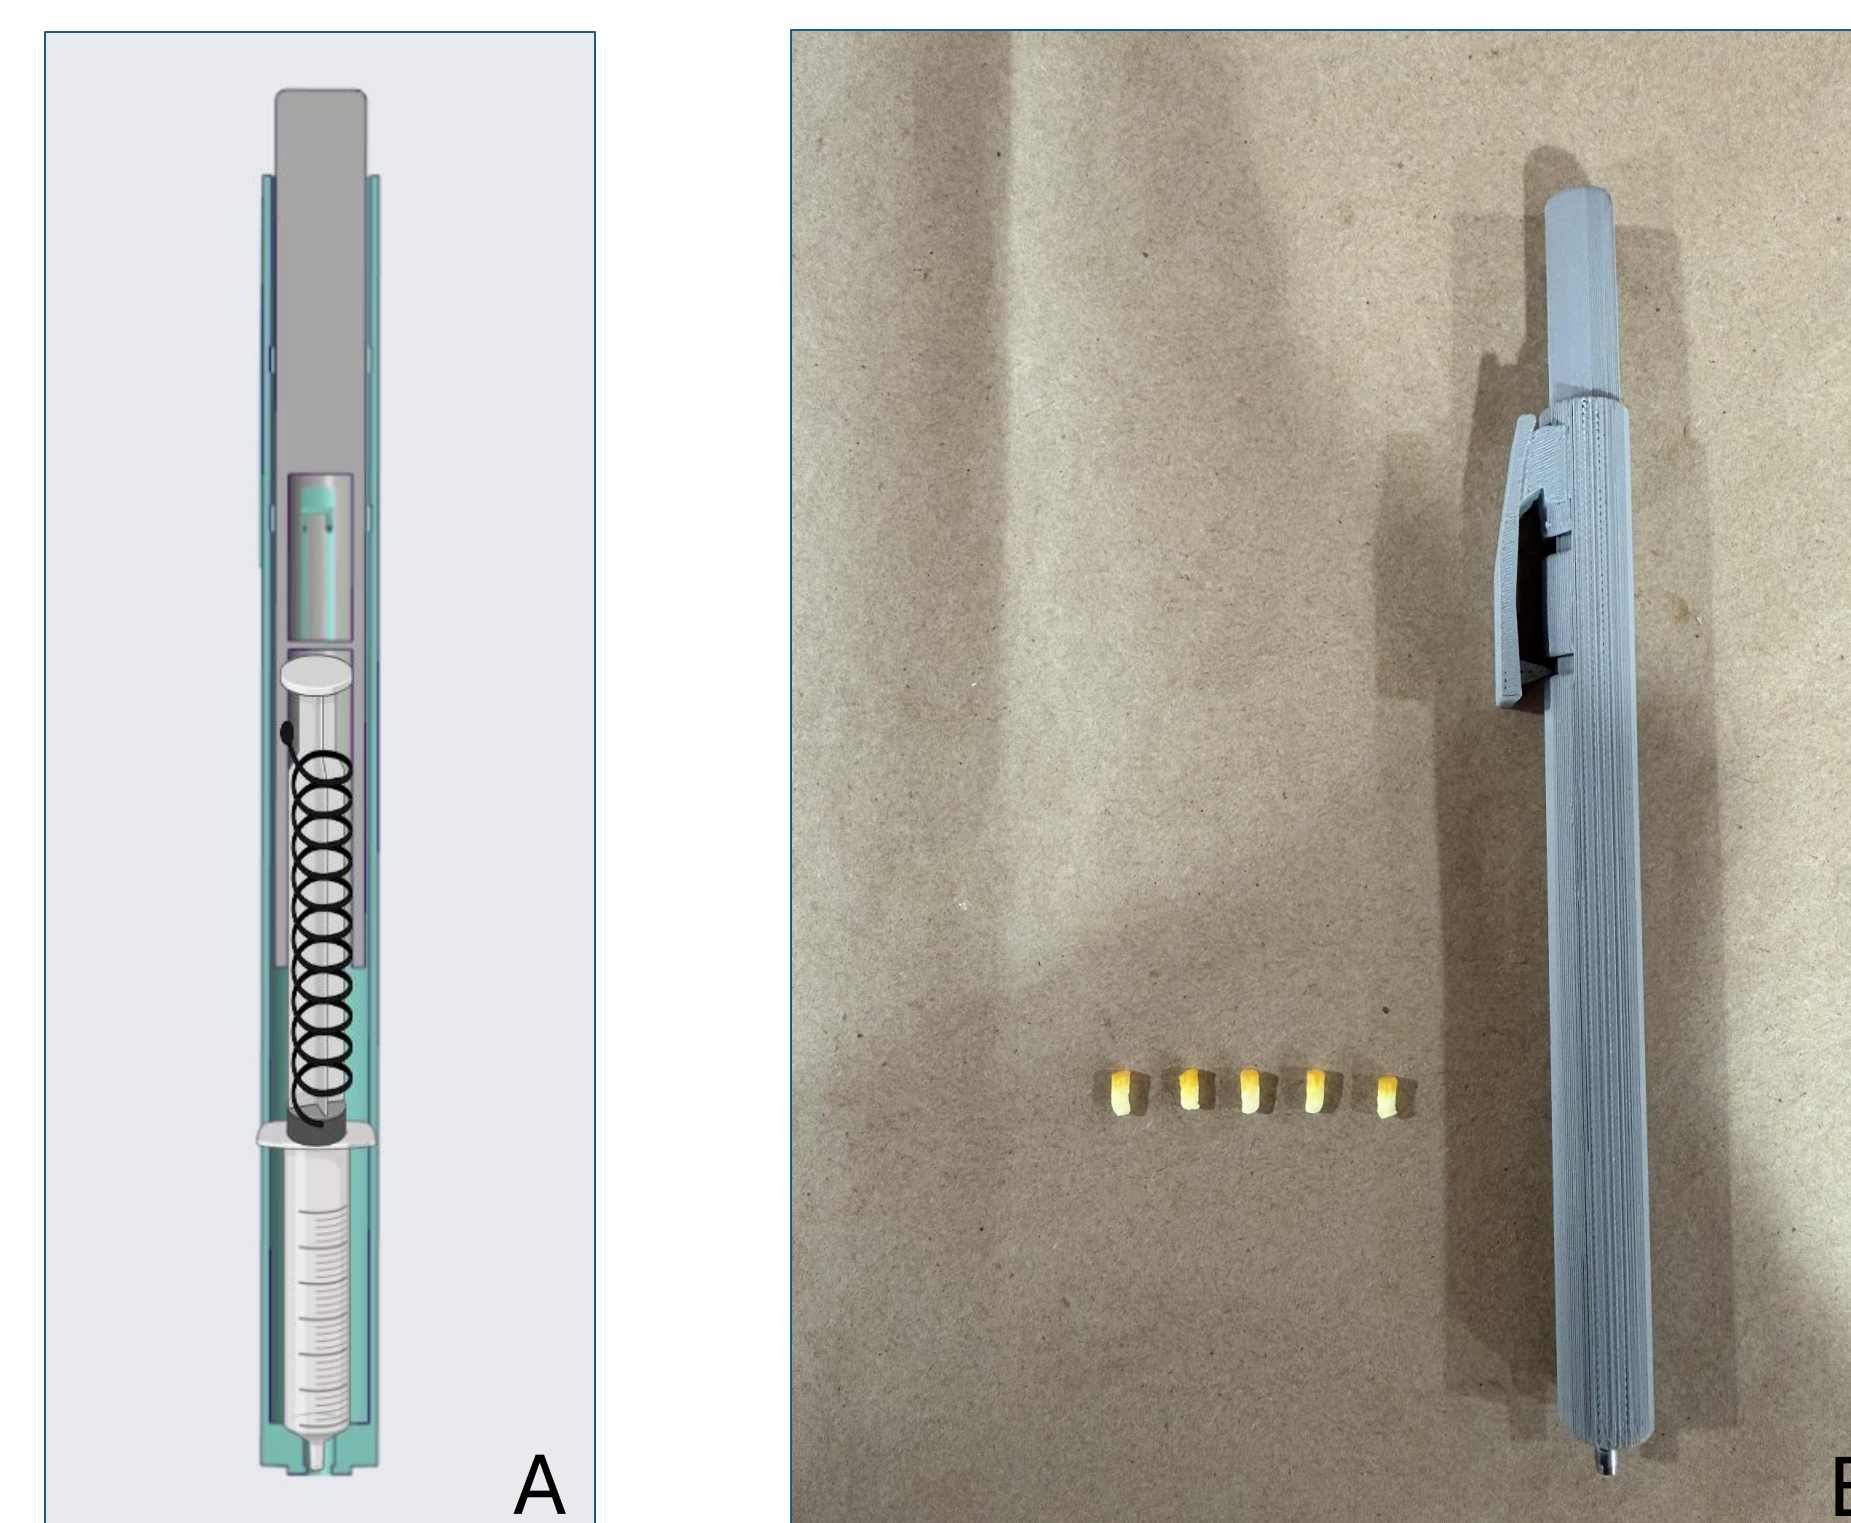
(a) Section view of the automated skin punch biopsy tool showing the internal syringe and spring mechanism used to generate suction during sample collection. (b) Physical prototype of the tool shown next to orange samples collected during testing.
